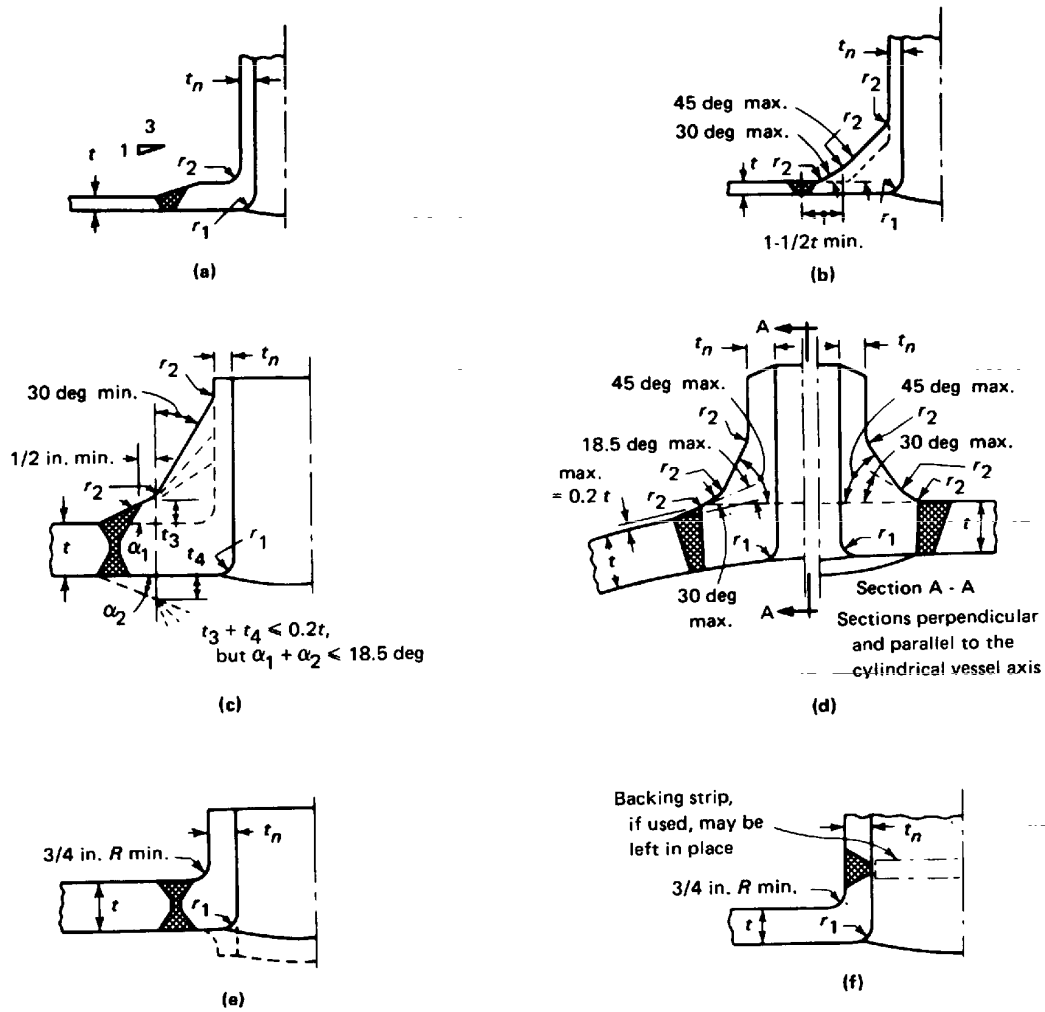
(a)-1 NOZZLES ATTACHED BY FULL PENETRATION BUTT WELDS
